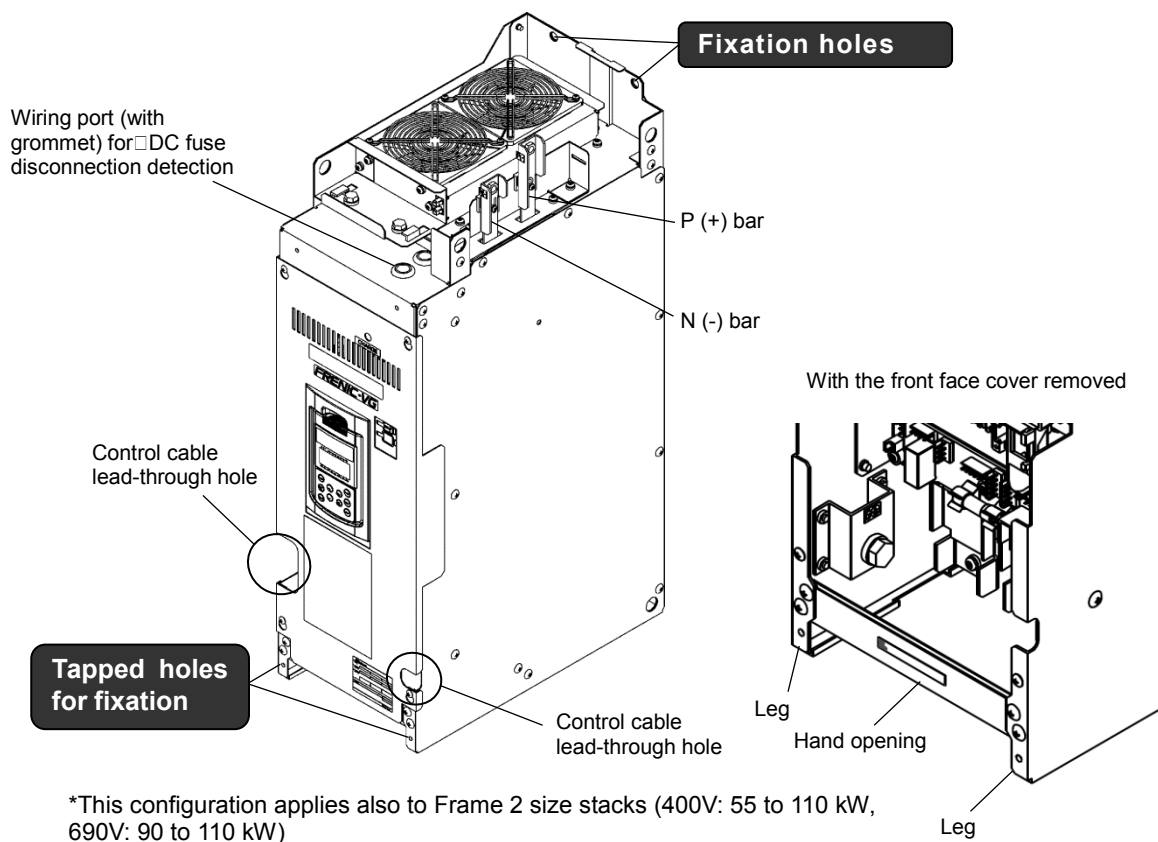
Fixation points for Frame 1 size (400V: 30 to 45 kW)
